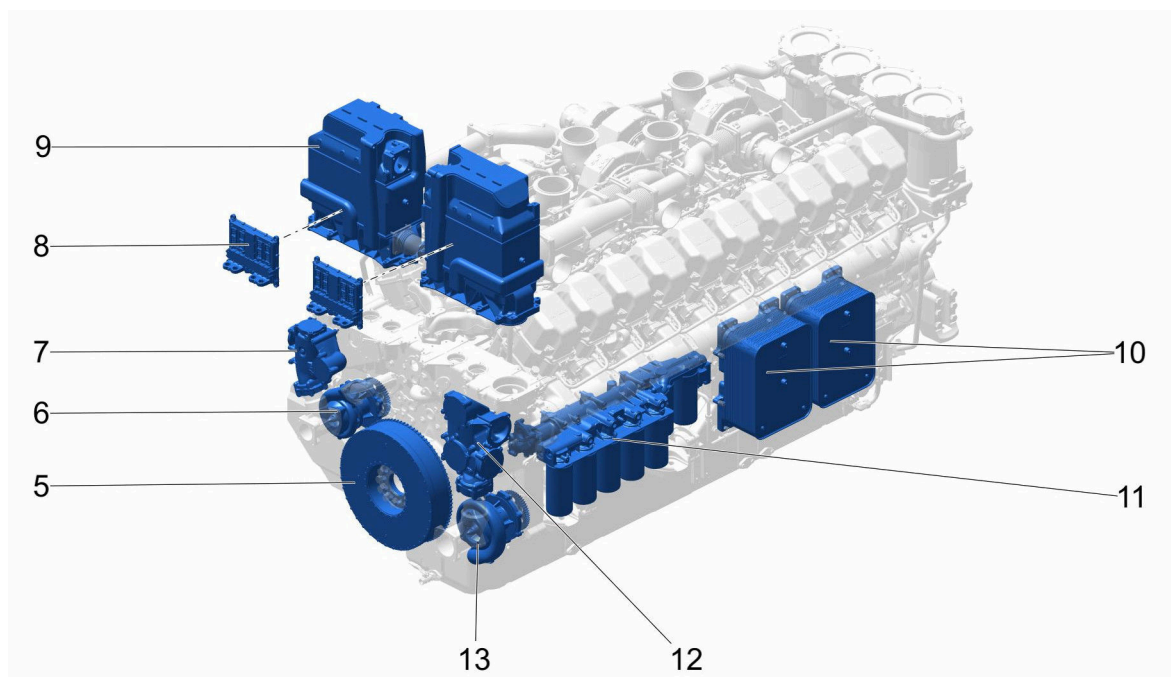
Visual inspection of Diesel engine (2)
